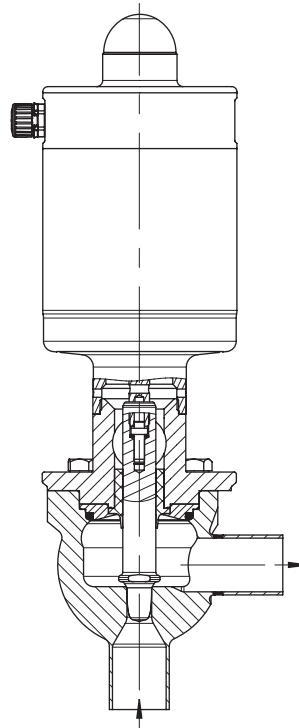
Type 3347/3379 Control Valve with welding ends
